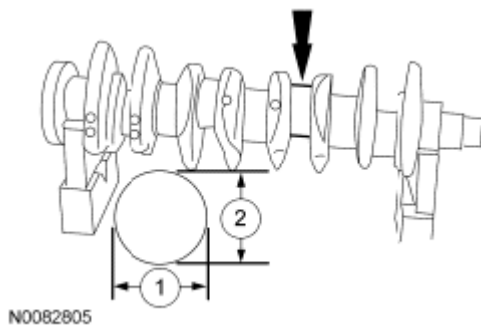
Identifying Measuring Directions Of Crankshaft Connecting Rod Bearing Journal Diameters
